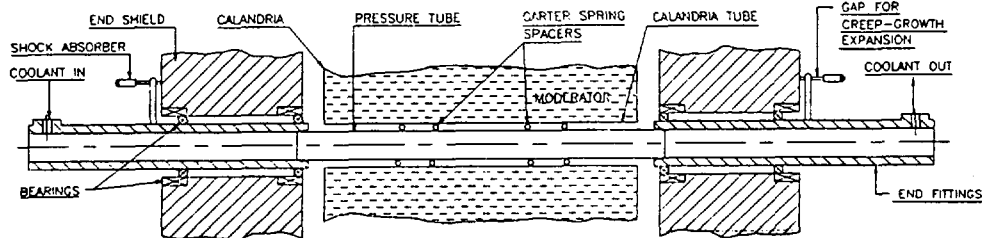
SCHEMATIC OF COOLANT CHANNEL ASSEMBLY
